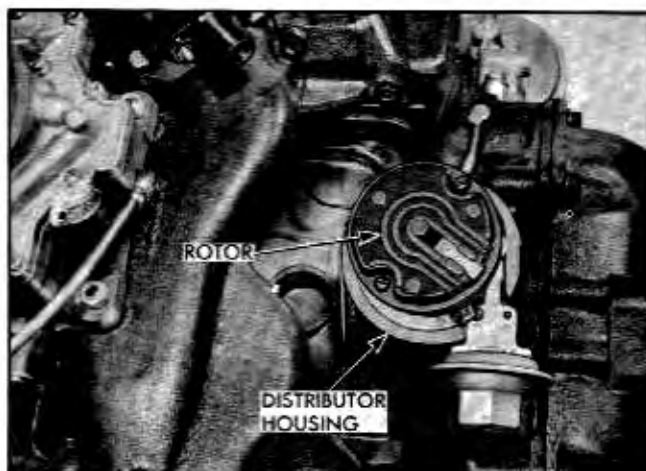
Relationship of Distributor Housing and Rotor in Firing Position for No. 1 Cylinder
